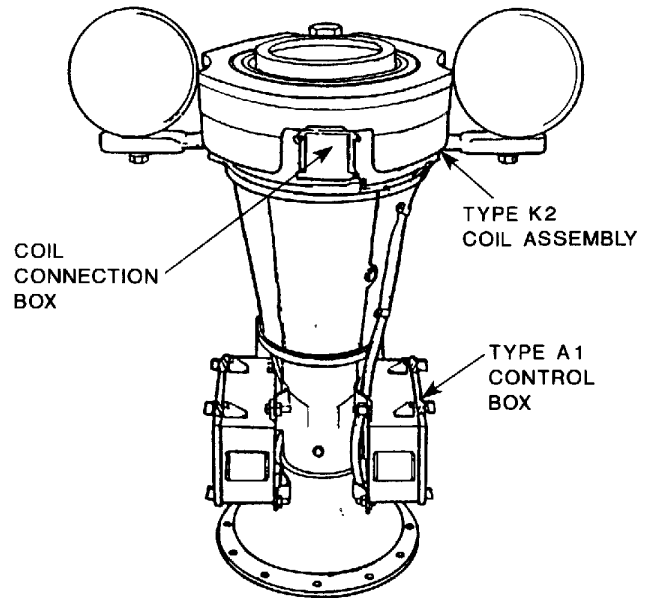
Type K-2 Compensating Coil Assembly and Type A-1 Control Box.
